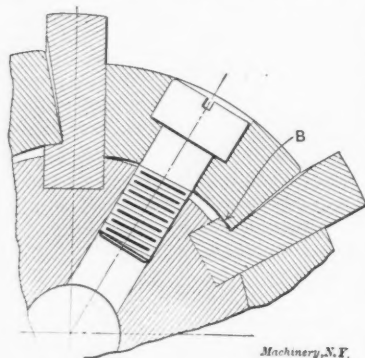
Enlarged Section of Reamer, showing Method of Binding.
